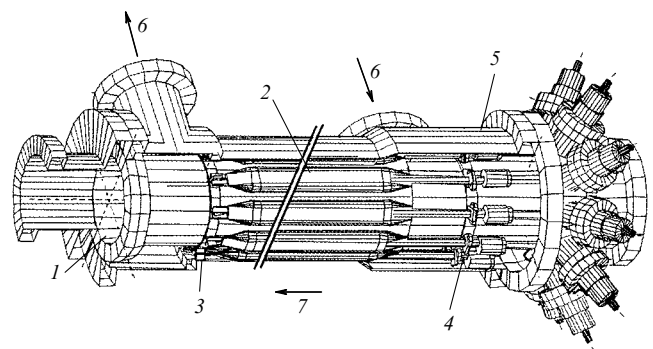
Testing zone of a neutron source: 1—inner wall, 2—chamber with specimens, 3, 4—mounting plates, 5—outer wall, 6—direction of a coolant flow, and 7—direction toward the center.
